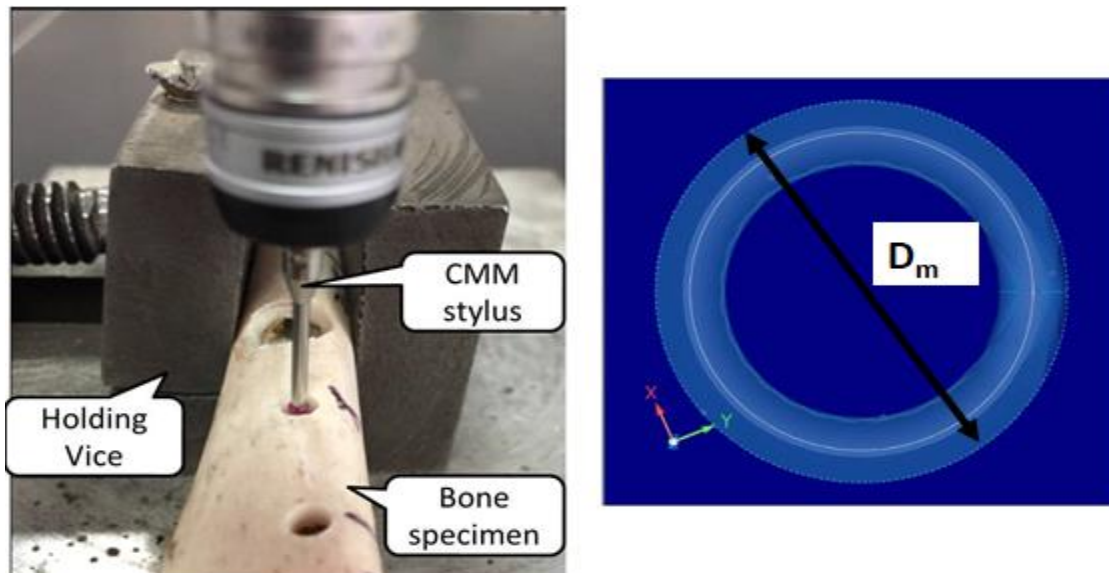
Measuring diameter of drilled holes using CMM machine
